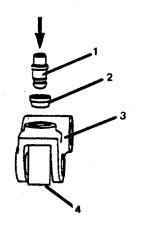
Cup Plug Installation in Cam Follower Shaft.
